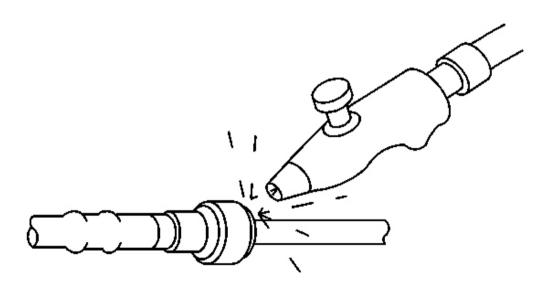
Blowing Dirt Out Of Fitting (Metal Collar) Courtesy of GENERAL MOTORS CORP.
